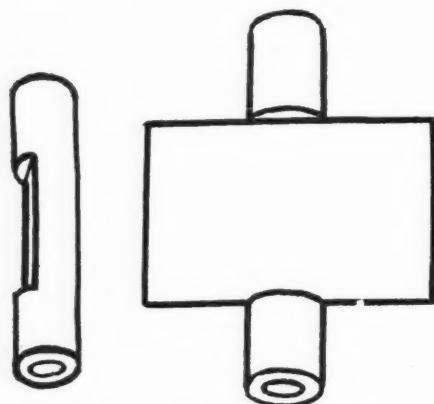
Drawing of tube ground on one side; tube and ribbon material.
